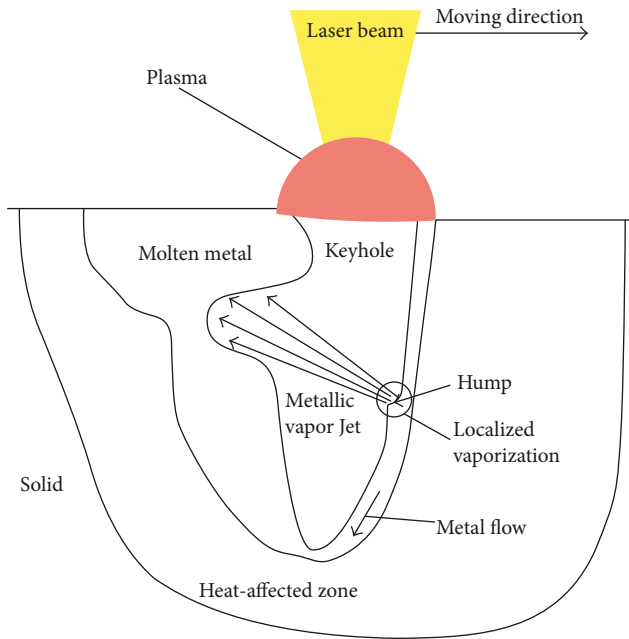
A cross-sectional schematic of a side view (the interface between two solids) of the melt-pool formed during a laser welding process.
